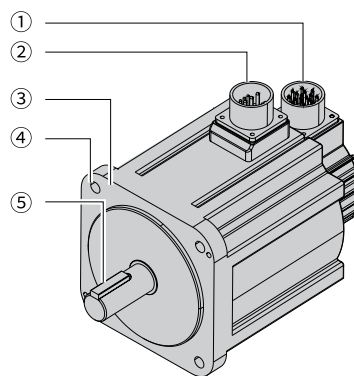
Components of servo drives in flange sizes 100/130/180
